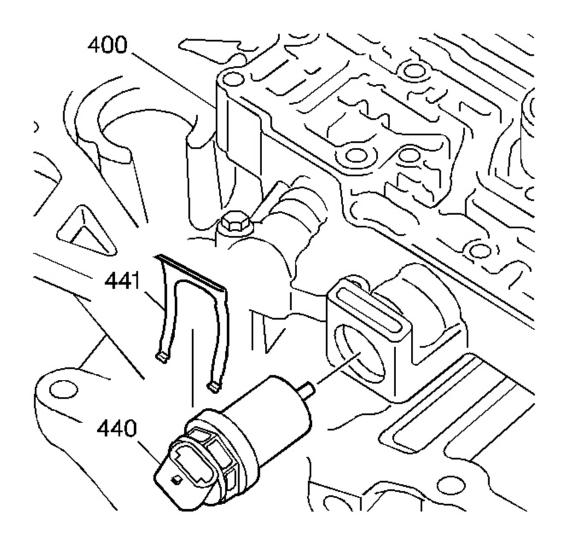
View Of Input Speed Sensor Courtesy of GENERAL MOTORS CORP.
